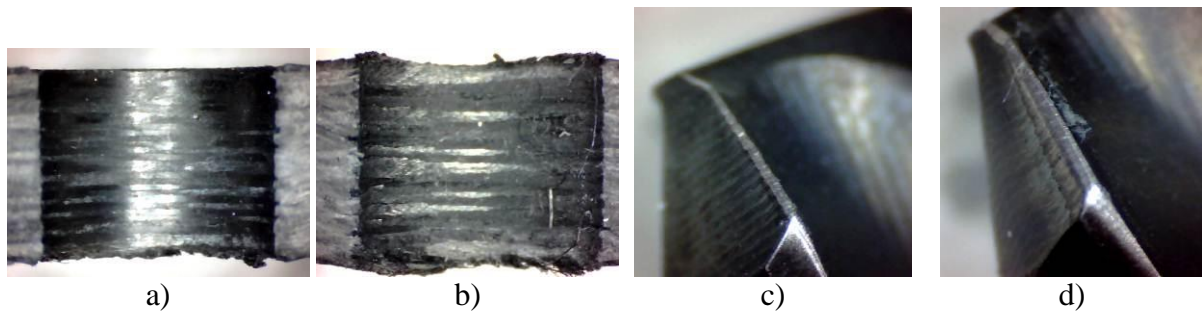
Microscope images of a) the first hole drilled, b) the eighteenth hole drilled, c) the drill bit cutting edge after drilling four holes and d) the drill bit cutting edge after drilling 24 holes.
